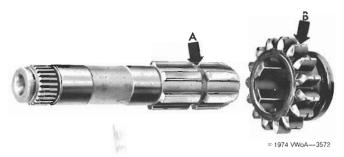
Gear and shaft used in 1974 transmissions. The grooves at arrows A and B identify the new parts, which can be service installed as a set in vehicles built since November 1972.
